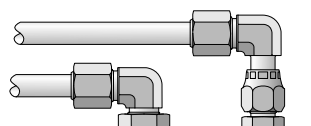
Swivel end fitting with straight connector provides clearance above regular elbow
